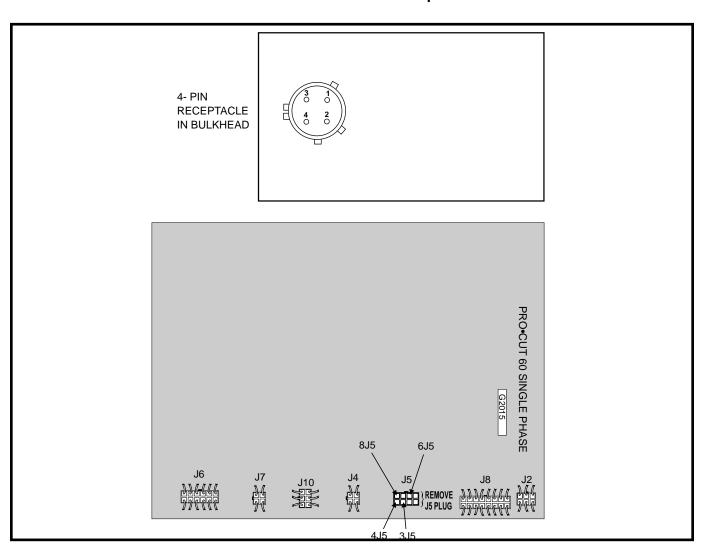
Control Board and 4-Pin Connector Test Points
